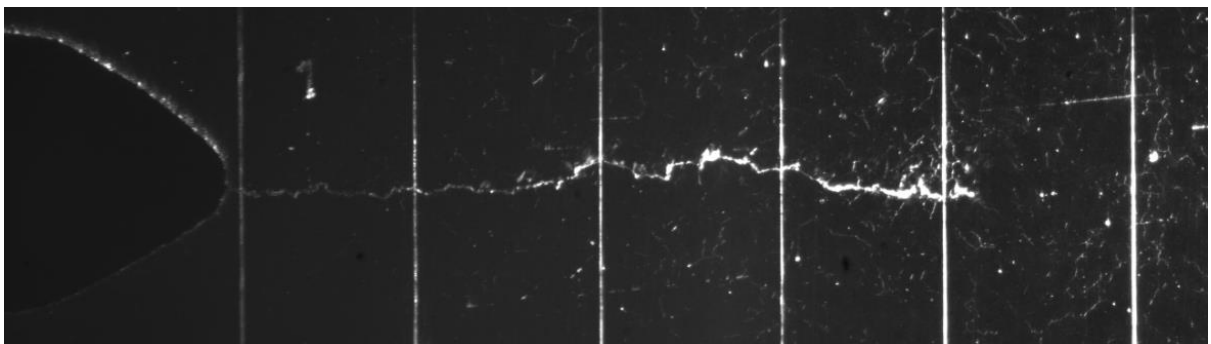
XY6 fatigue crack (initial)
